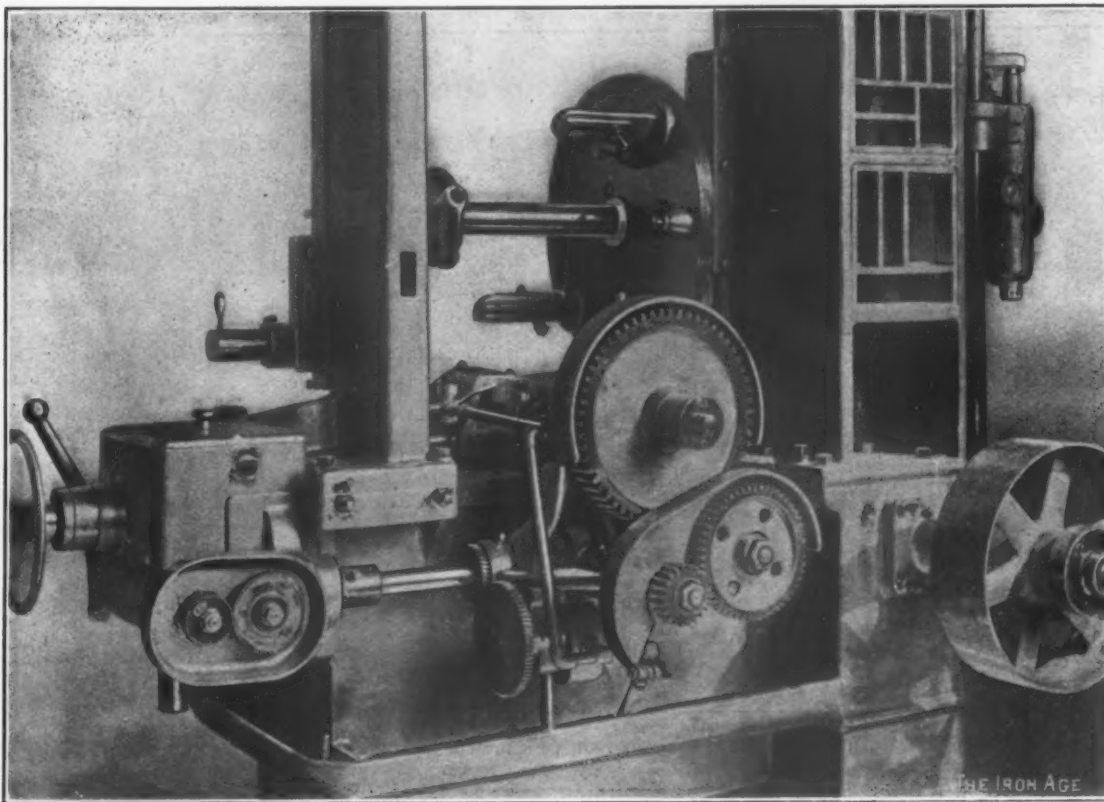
Rear View of the No. 5 Automatic Spur Gear Cutter, Showing the Drive and Feed of the Cutter Spindle.
